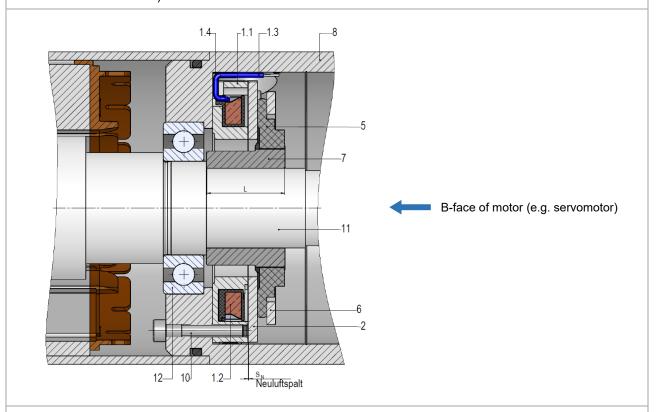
/2: Front side mounting of spring-applied single-disc brake SL 502..A00 (example) to the motor (e.g. servomotor); contact of hub (7) with stop shoulder of machine shaft (e.g. motor shaft) (11); assembly of hub (7) and machine shaft (e.g. motor shaft) (11) by interference fit (see Section 4.1.2)
